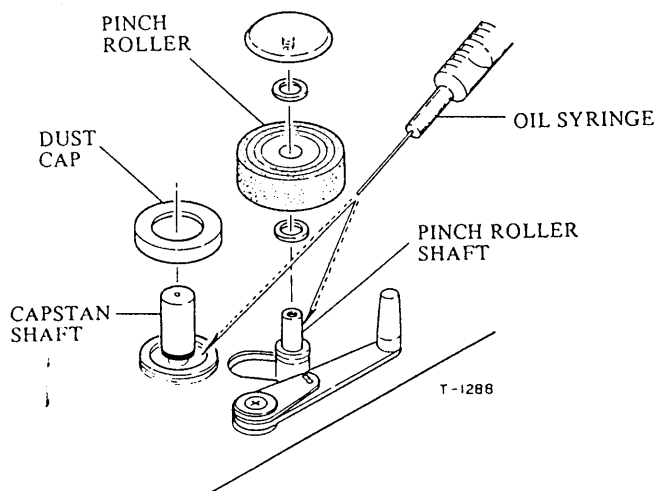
Capstan Shaft and Pinch Roller Shaft Oiling Points
